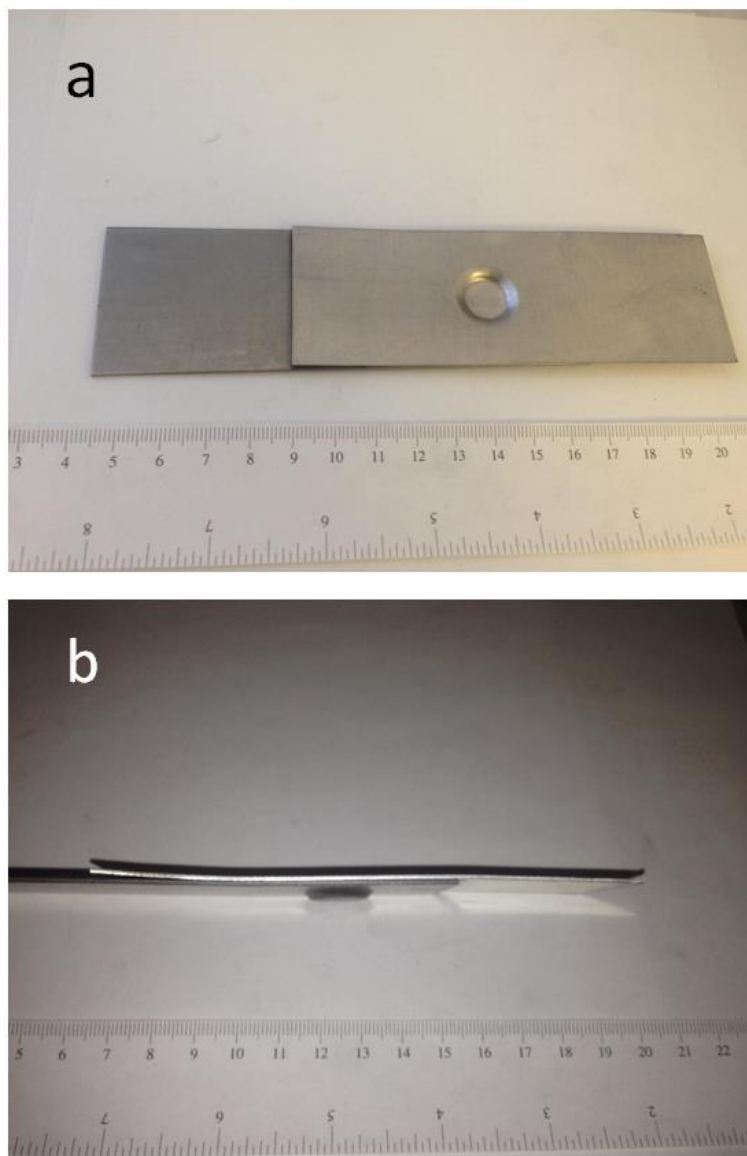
Rear view (a) and side view (b) of a weld created using parameters combination 4
